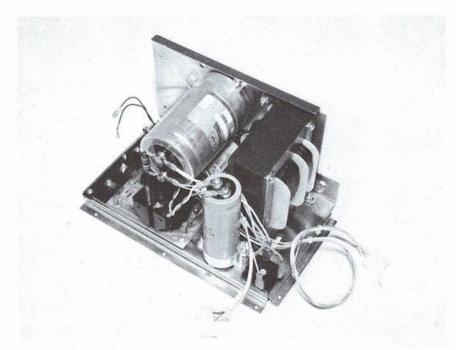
Sol-20 power supply subchassis assembly. (Rear of subchassis at left.)
